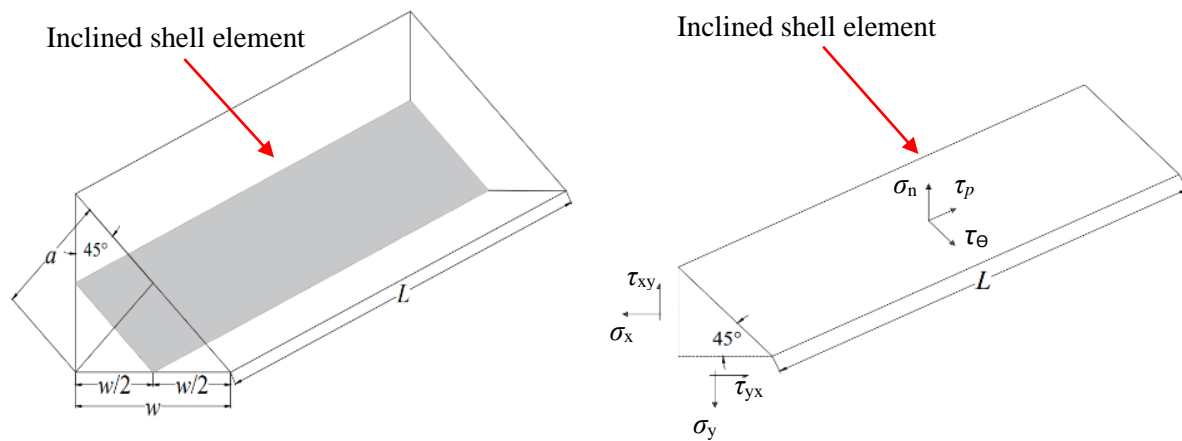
Stresses acting on the inclined surface of the weld.
